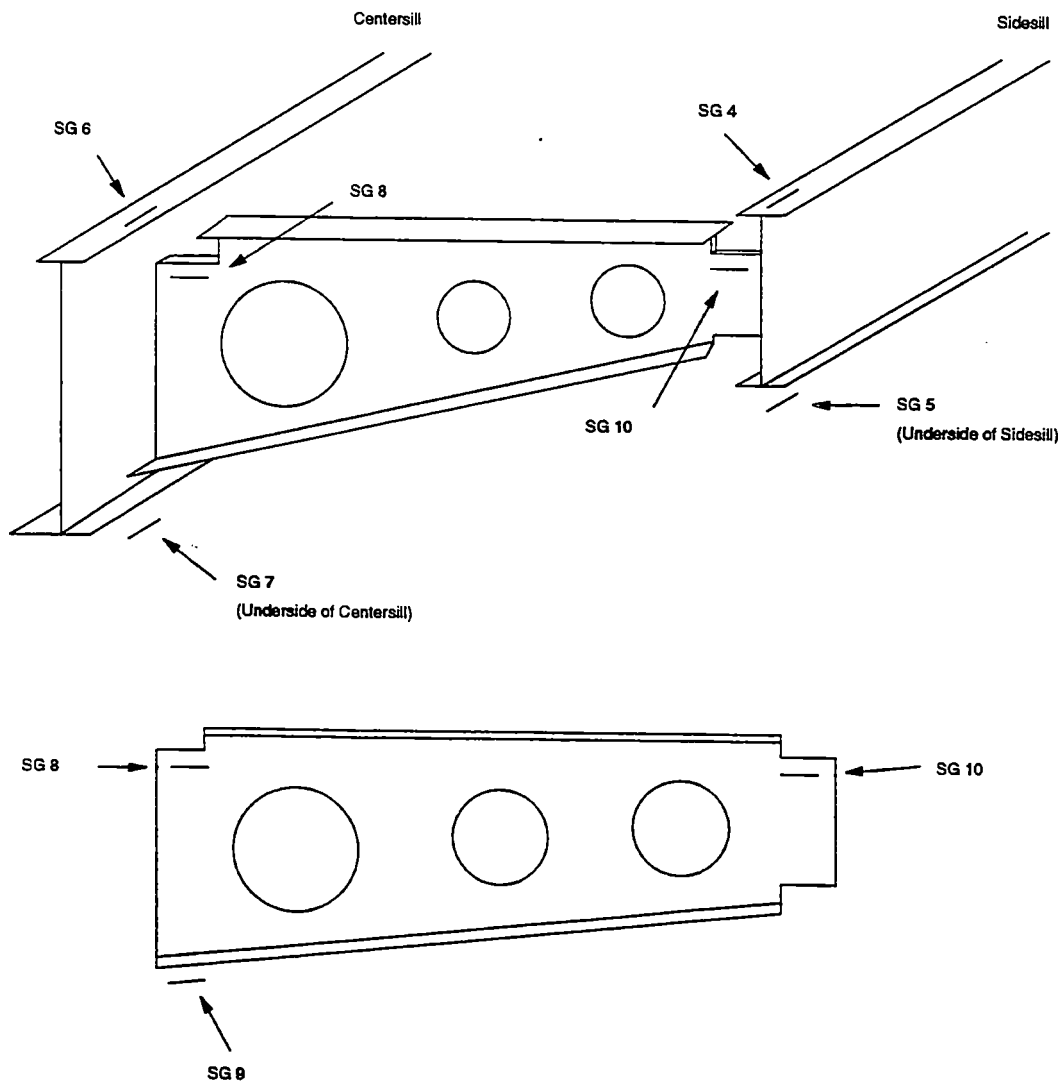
Detail F (of Exhibit A-2), Load Platform #1
